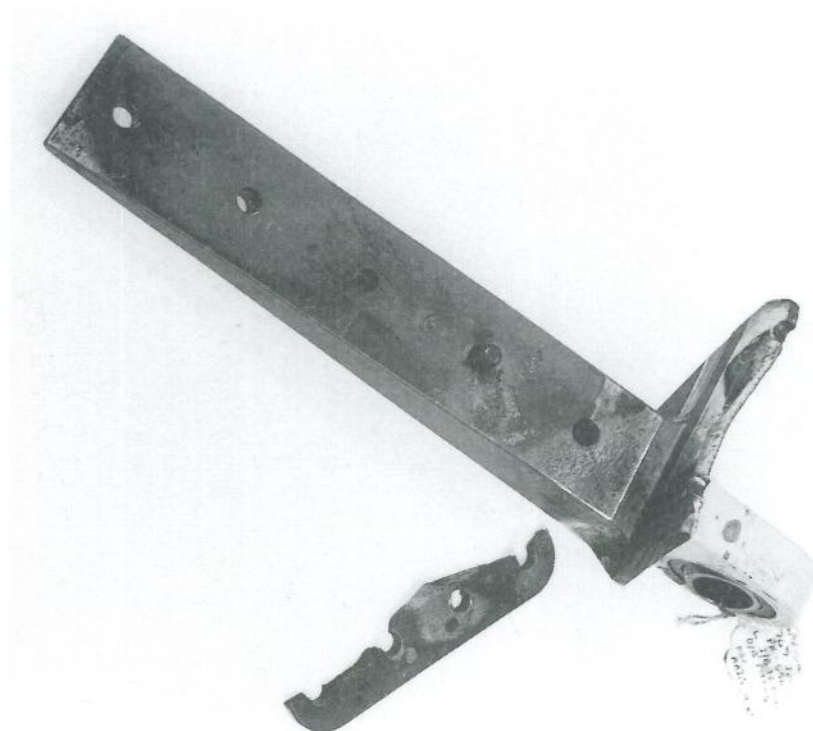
Fitting aft face and bottom flange (Showing fretting on both surfaces)
